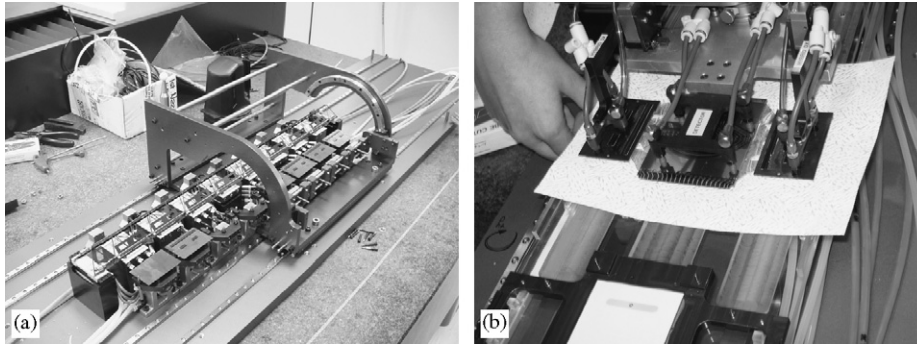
The ladder assembly jig: (a) the eight support for sensors and the hybrid folding tool; (b) the tool for module positioning.
